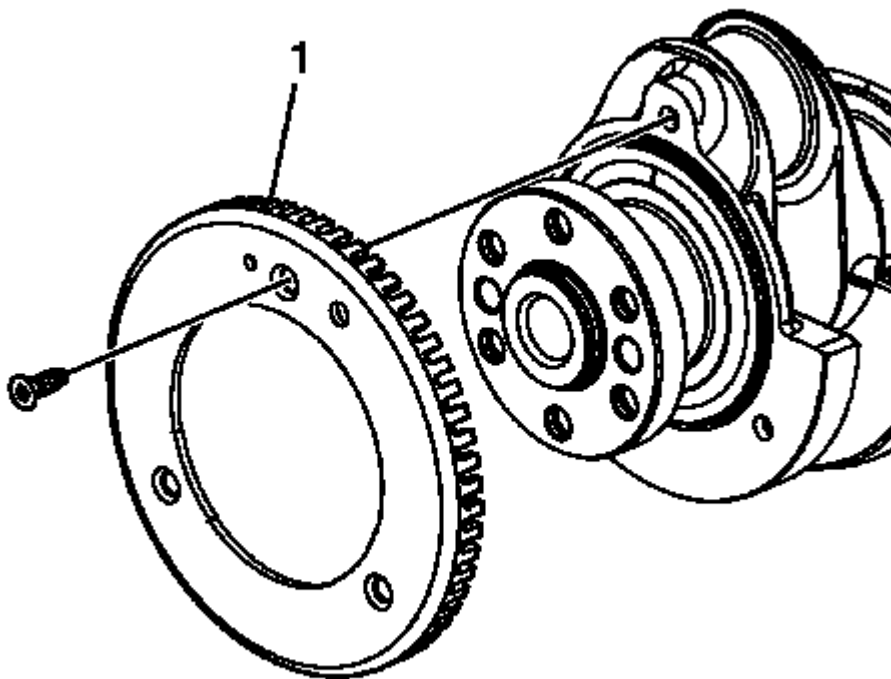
Crankshaft Position Reluctor Ring May Be Replaced If Damaged
